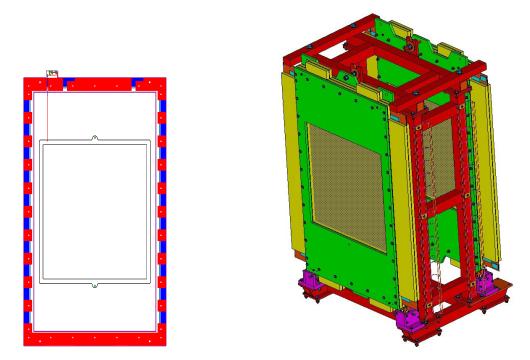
(Left) Technical drawing of cathode (k-plane) PCB. (Right) Technical drawing of the two drift chambers mounted in the Aluminum frame such that the scattered particles would enter the chamber from the left. The chambers are fixed to the frame by a bolt through the top tab on the chamber plate which allows for fine adjustments to the pitch. The downstream chamber (DC2) is mounted in the reverse orientation from the upstream chamber (DC1).
